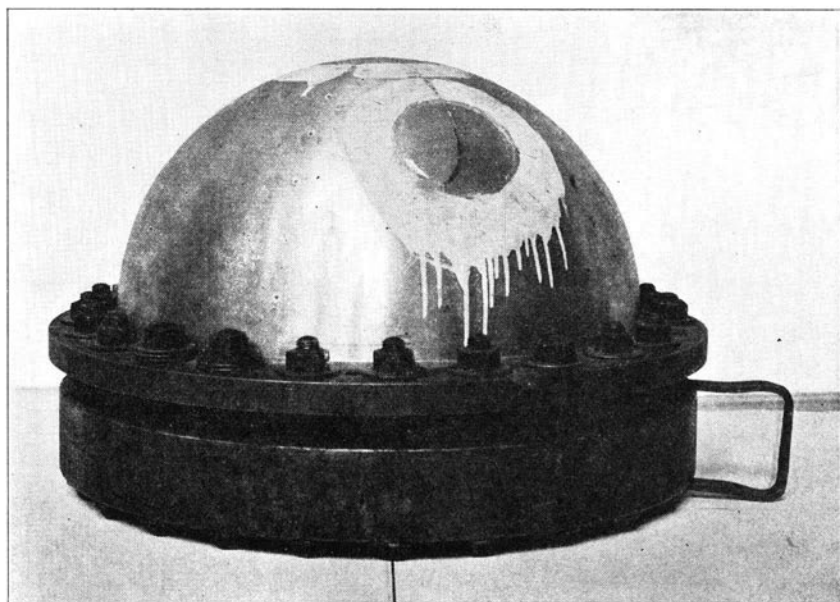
STEEL RING FOR HOLDING ALUMINUM SPECIMEN IN PLANE BASE
